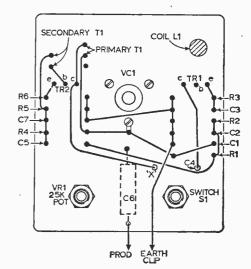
shows wiring on the front of the panel between resistors and other parts. Any thin, insulated wire is satisfactory or thin tinned copper bare wire can be employed with 1mm sleeving.
